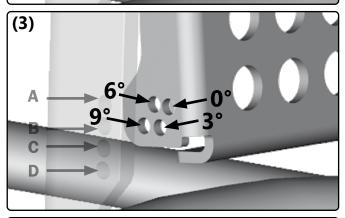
shows the bore picture for the possible camber setting for frame size 3 and 4.
